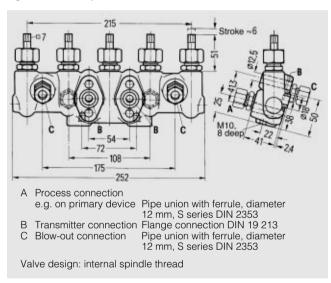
/67 Five-way valve manifold DN 5, dimensions
